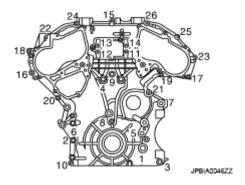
Timing Chain Case Mounting Bolts Tightening Sequence Courtesy of NISSAN MOTOR CO., U.S.A.
